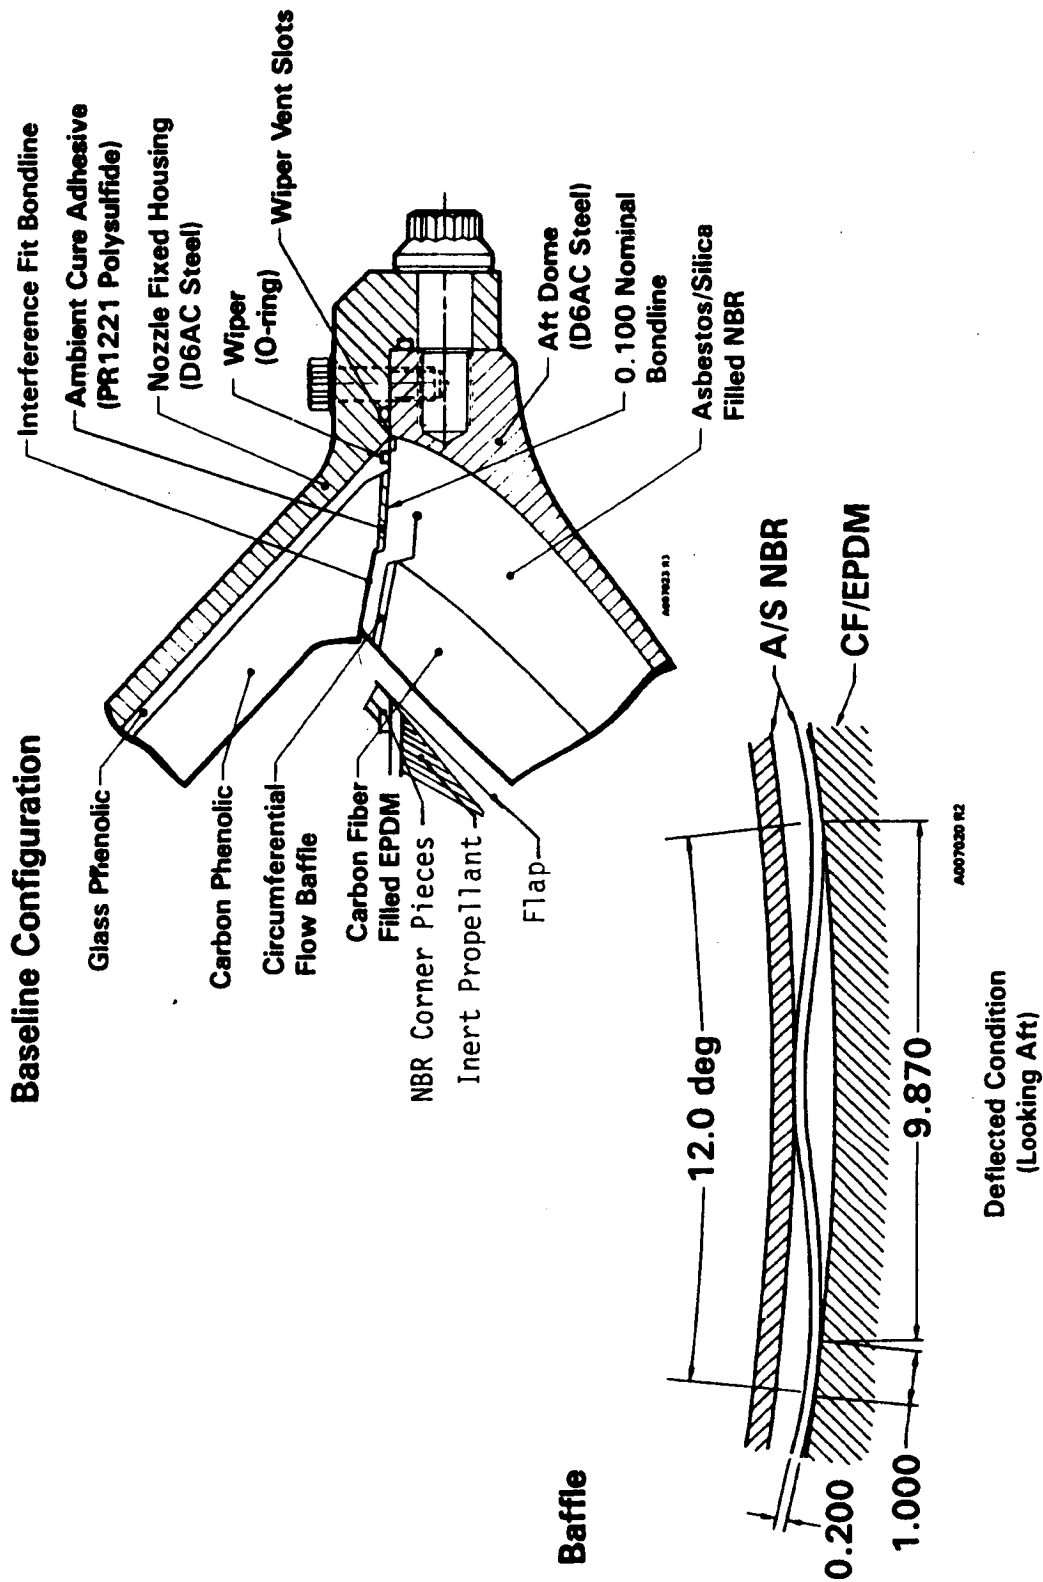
Nozzle-to-Case Joint Assembly
